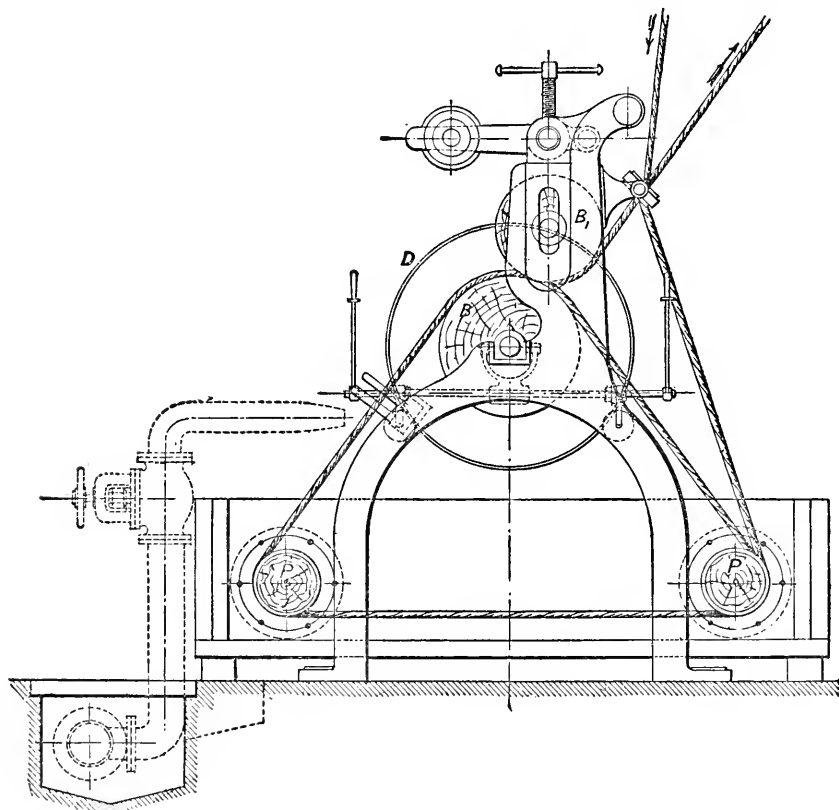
Improved bleach-house washing machine (Mather & Platt).
